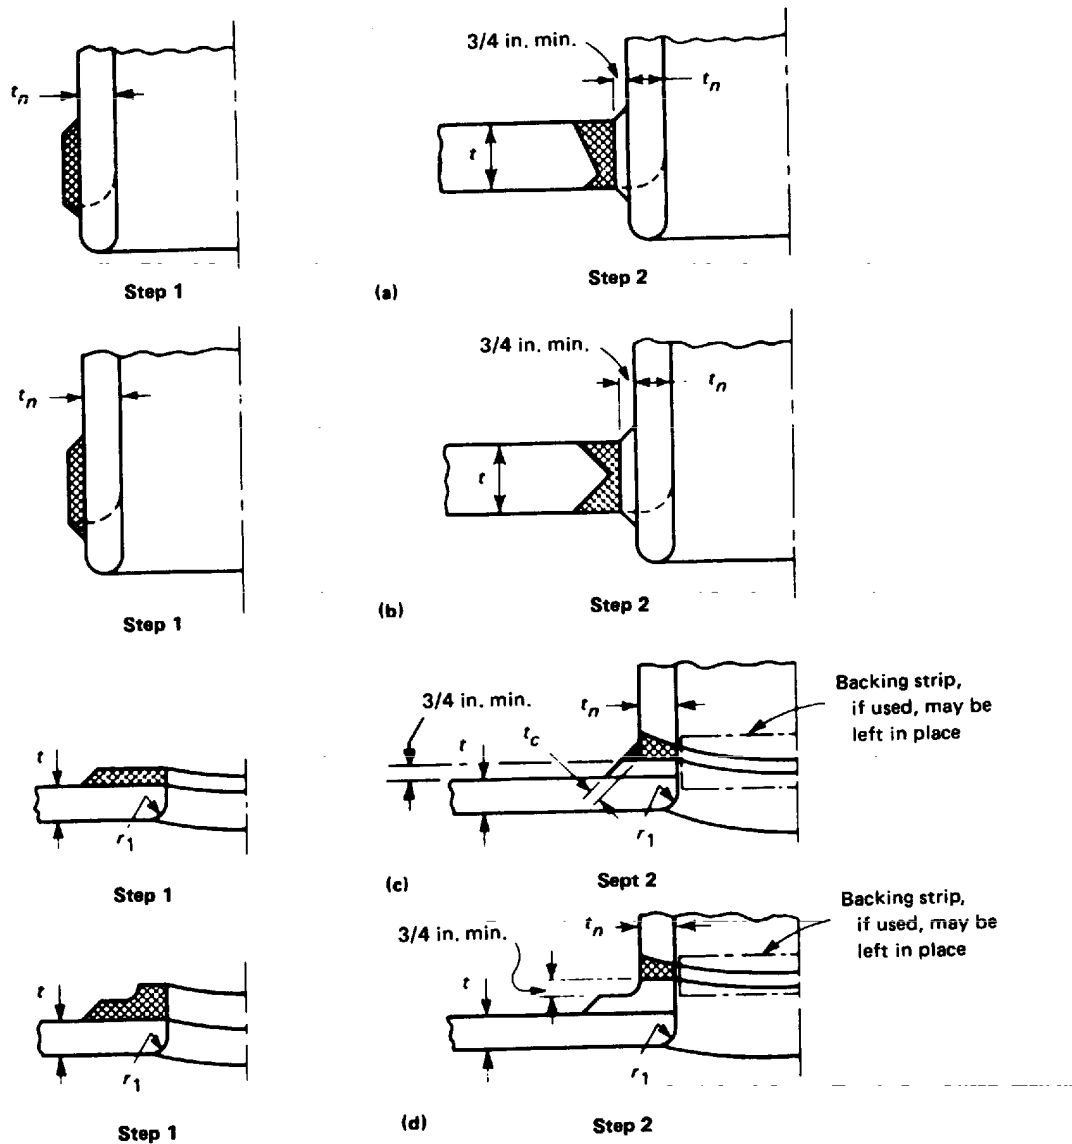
(c)-1 DEPOSITED WELD METAL FOR OPENINGS AND NOZZLES
